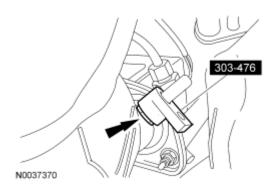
Engine Mount Nut Courtesy of FORD MOTOR CO.
